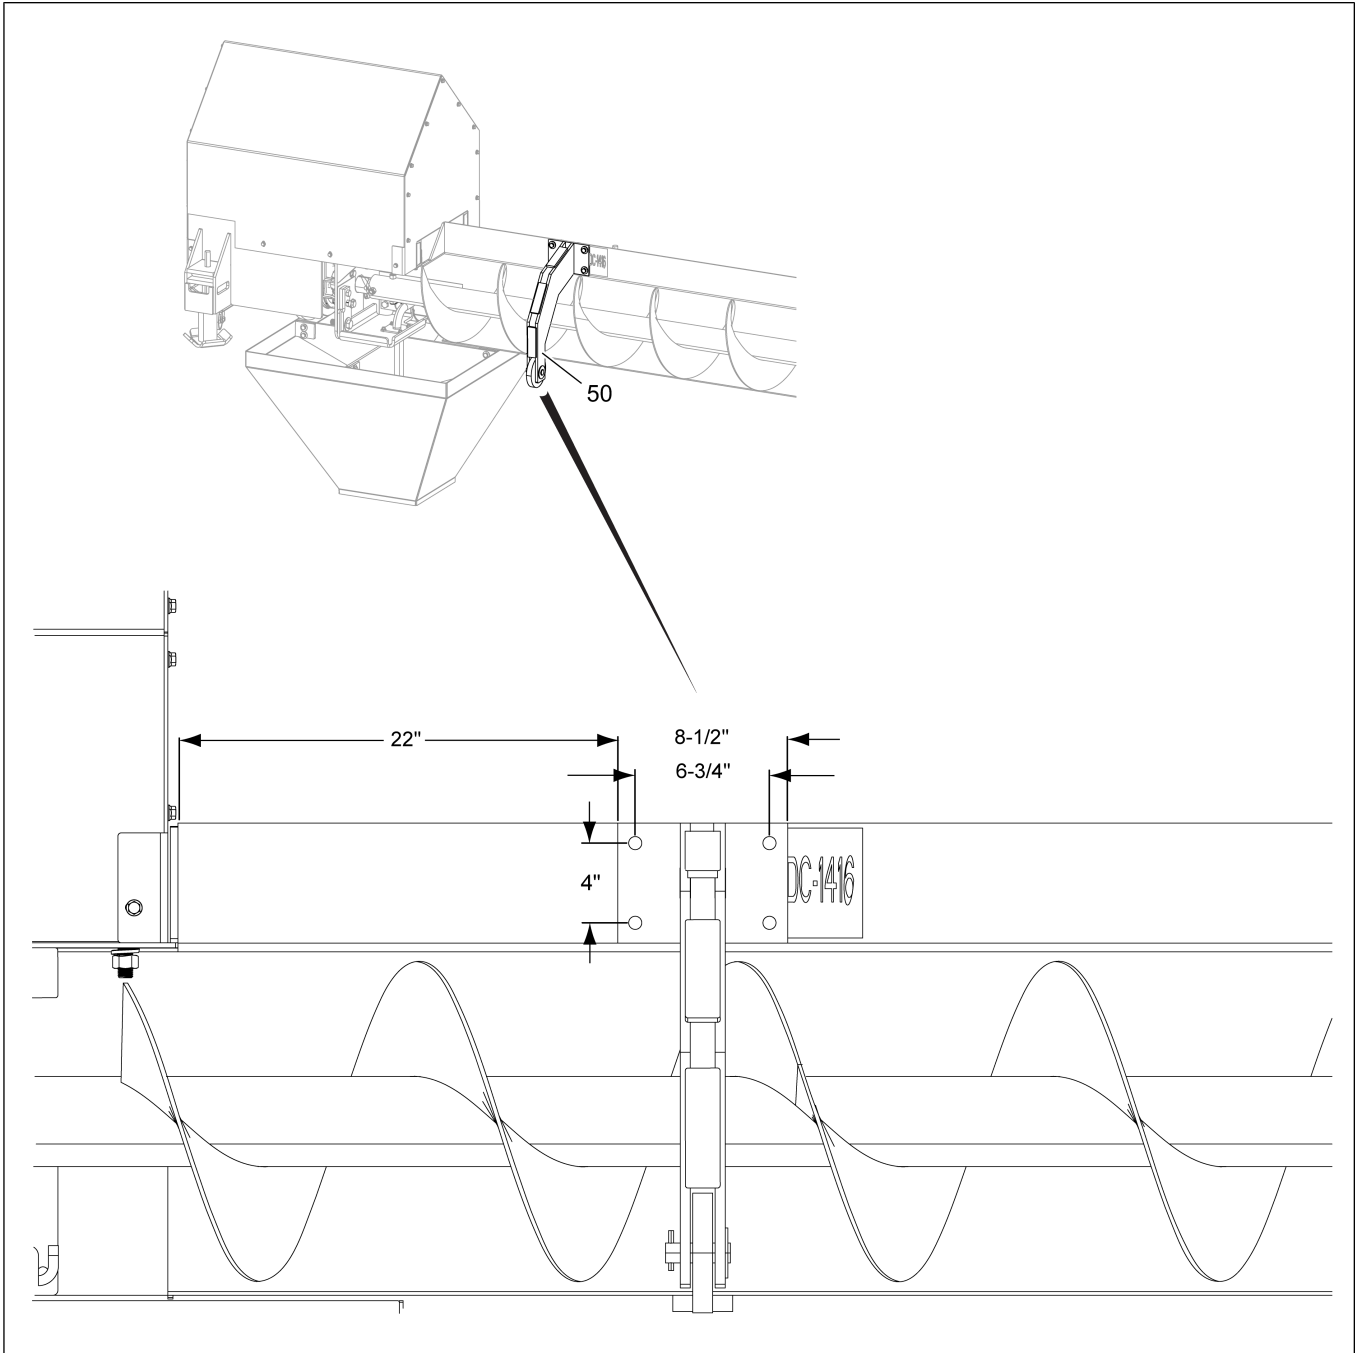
Position of wheel assembly, rear support and front wheel strut
